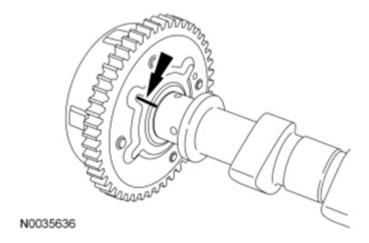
Locating Sprocket And Camshaft Reference Mark Courtesy of FORD MOTOR CO.
